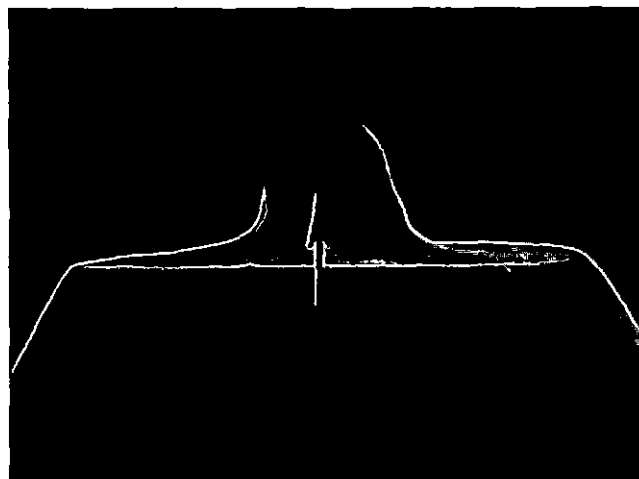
, (F60284). Eroded injector cup tip and holes
